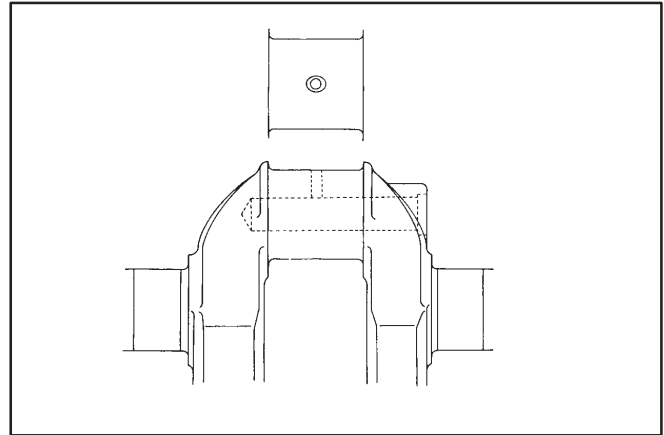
OIL HOLE IN THE CRANKSHAFT CONNECTING ROD JOURNAL
